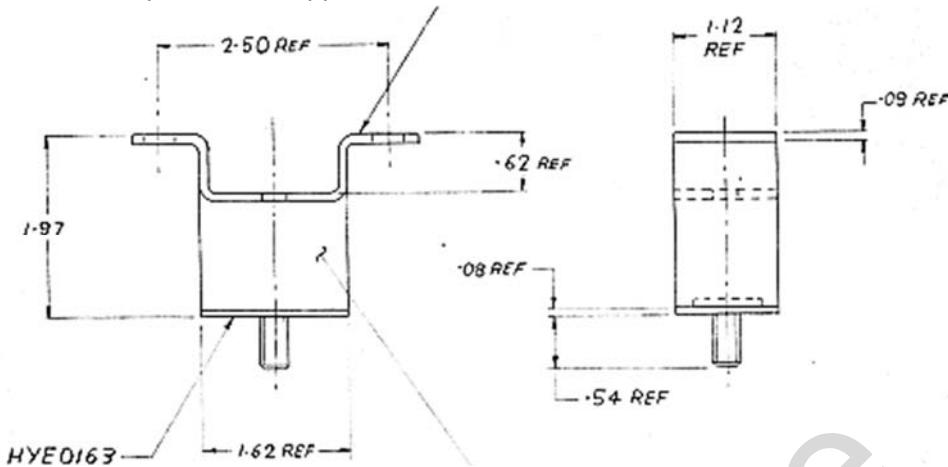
Exhaust mounting AYA2071/2A2200.
